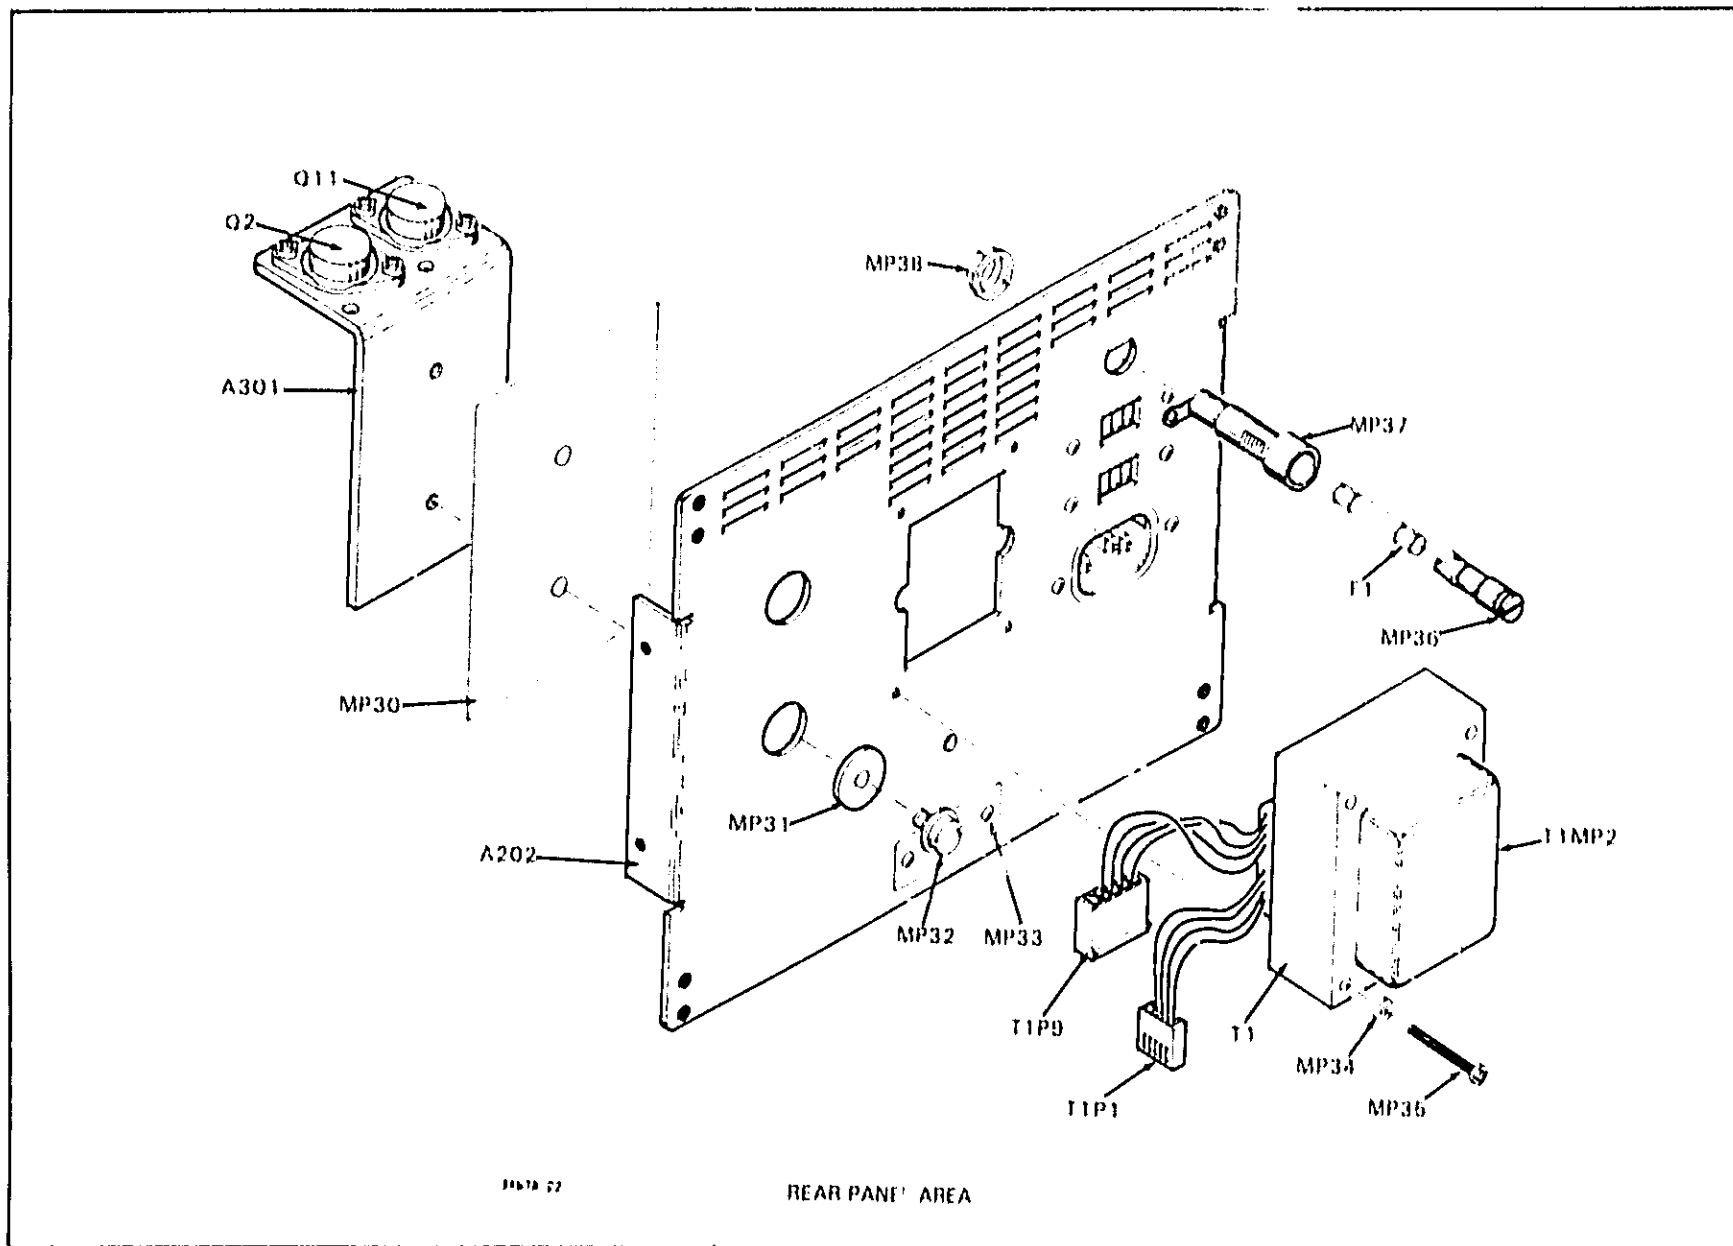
Exploded View, Miscellaneous Parts (Cont'd).
